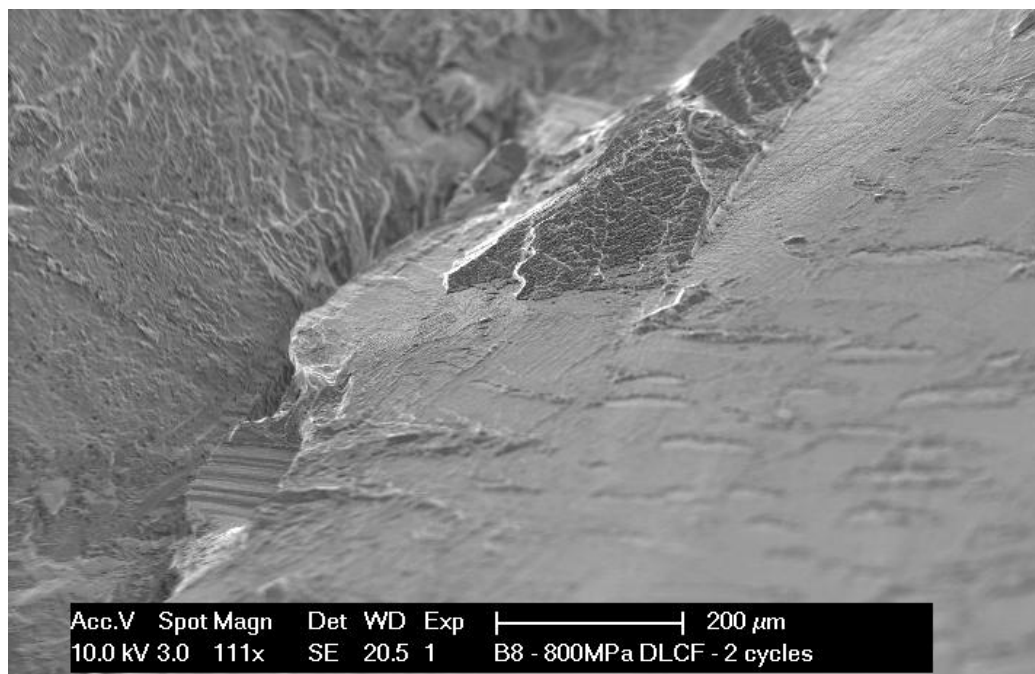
DLCF test specimen B8, 800MPa, 2 cycles to failure. Large angled facet, cleavage cracking
